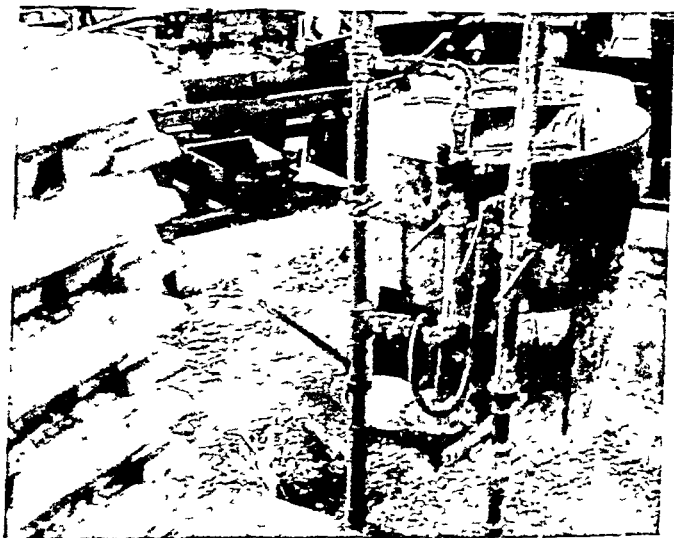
Lead melting pot without hood. Note dross and spilled lead on floor.
